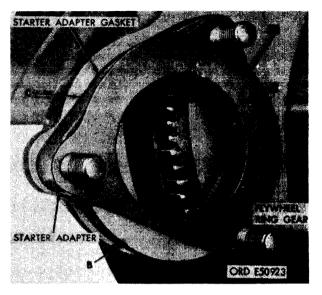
REMOVING OR INSTALLING STARTER GASKET, STARTER ADAPTER, STARTER ADAPTER GASKET, AND INSPECTING FLYWHEEL RING GEAR.
